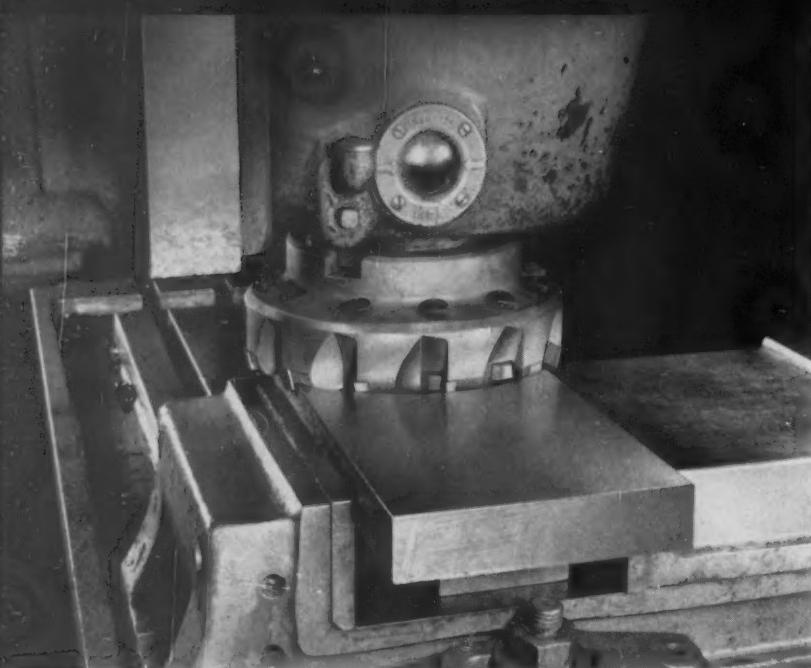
(Left) An 8-inch diameter face mill having solid carbide blades is mounted on the spindle of a vertical milling machine. A deep cut is being taken across the face of hot-rolled alloy-steel plate.
